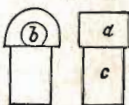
Cover-hinge stud, full size, two views. *a*, head; *b*, joint-pin hole; *c*, stem.
